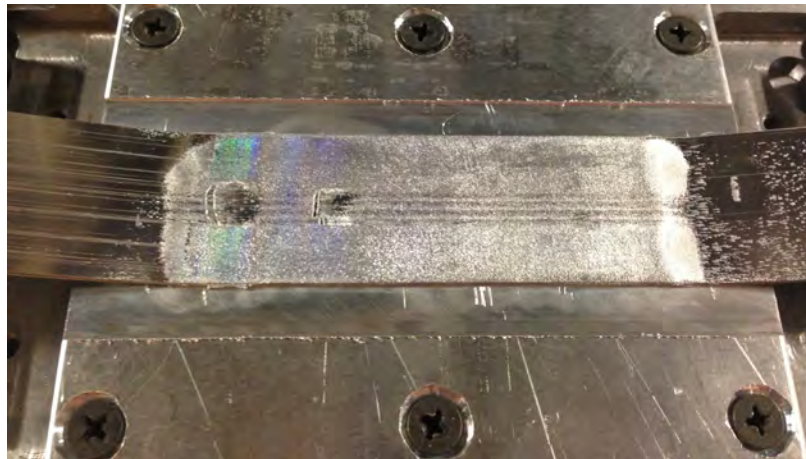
Area where aluminum did not weld because the ribbons kept the aluminum tape from making appropriate contact with the structure.
